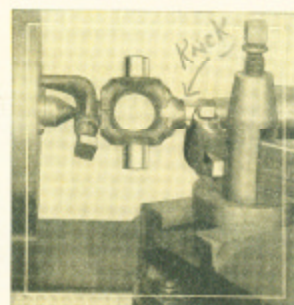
Turning a Knuckle Between Centers in the Lathe.
